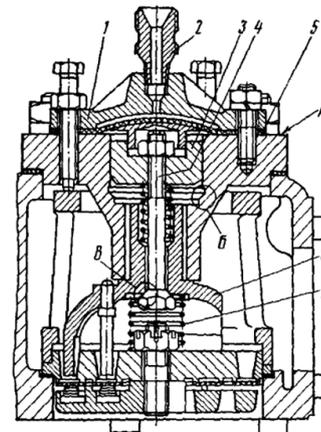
Unloading device for valve boxes of compressors KT6 and KT6: 1 – cover; 2 – fitting; 3 – piston; 4 – tie bolt; 5 – diaphragm; 6 – emphasis; 7 – spring
